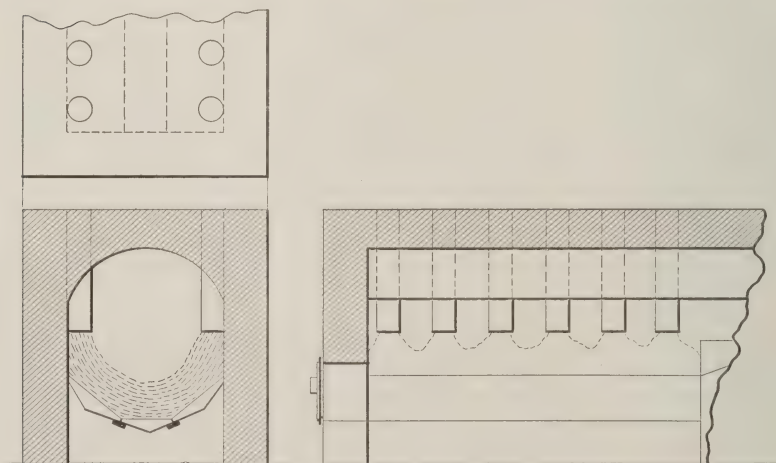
BUSH TAN FURNACE WITH MULTI-TUBE FEED.
